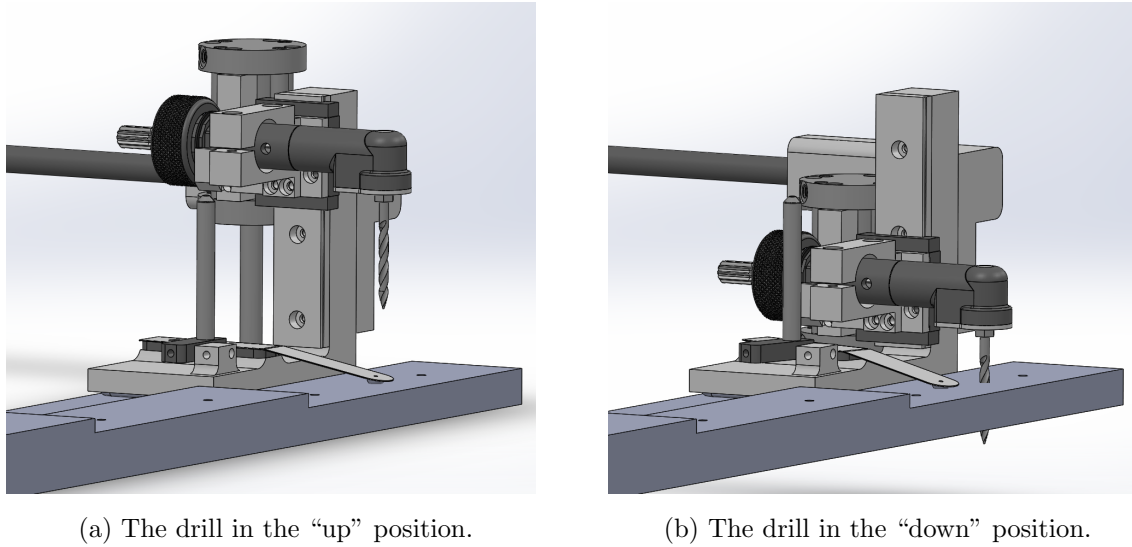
The above figures display the CAD design in Solidworks of the manually operated pneumatic tool. Note that the “locator pin” swings out of the path of the drill bit during drilling.
